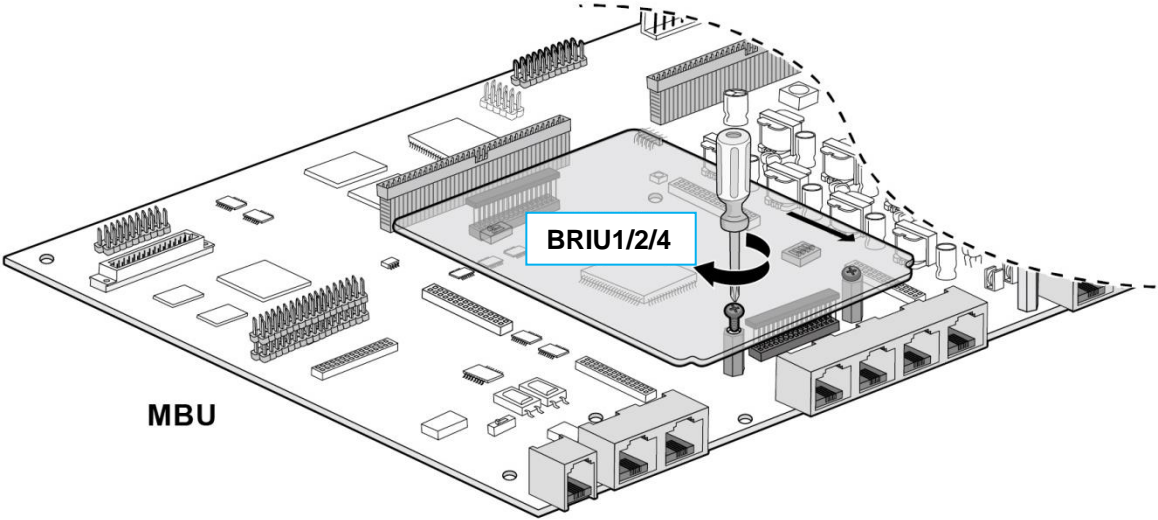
BRIU1/2/4 on MBU Board Installation
